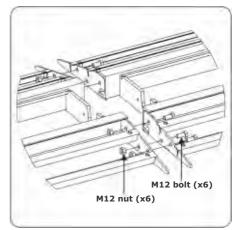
ASSEMBLE MODULAR STRUCTURES
